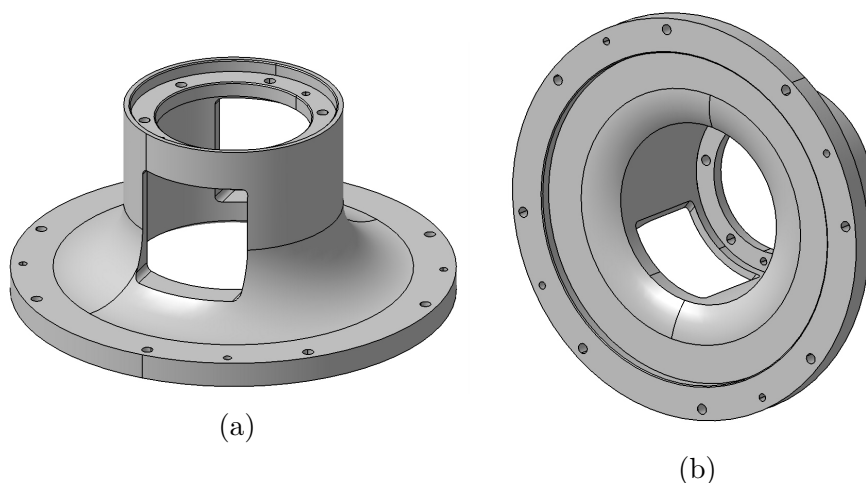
Geometry of the electric motor support of the CRCC configuration used for the test bench: (a) front view and (b) rear view
